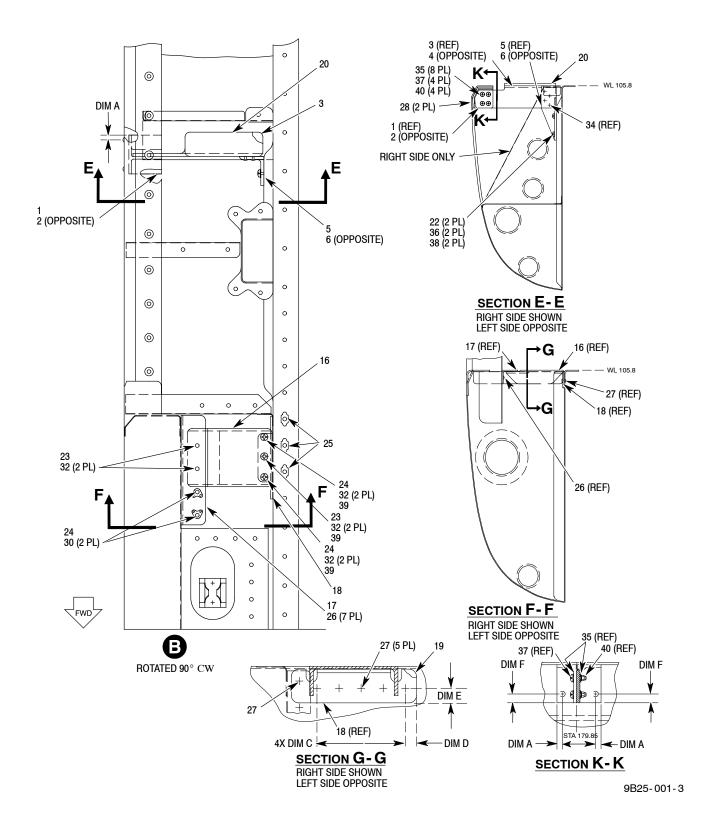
Modification of the 900 Configuration Tub Assembly (Sheet 3 of 3)
